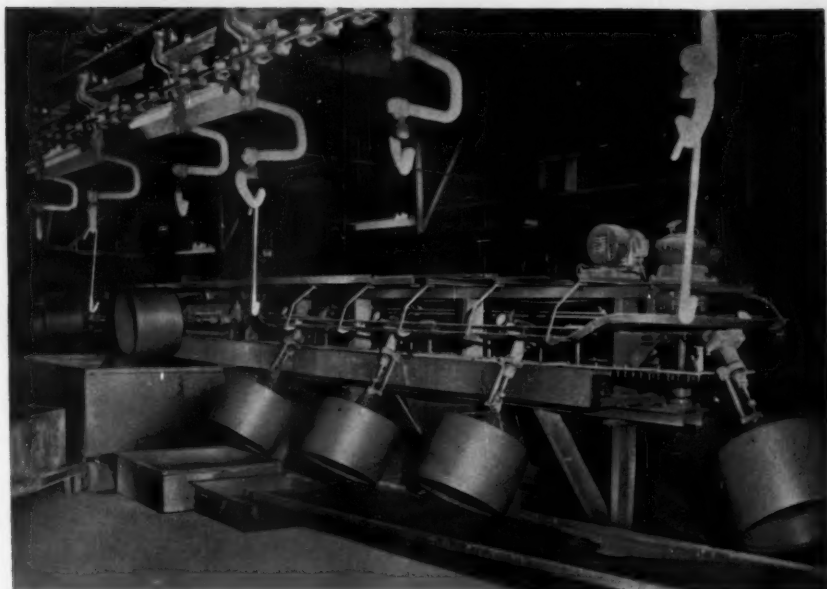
Washing-machine tubs are hand-loaded on a spider of a loop conveyor. A gear at the inner end of the carrier engages a rack that causes the tub to rotate until it is unloaded.
